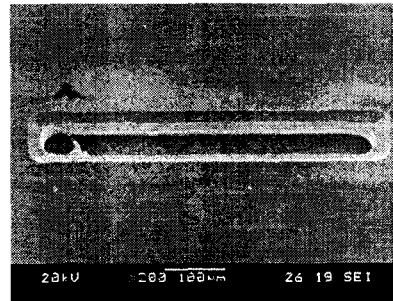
Groove with burr removal by electrical discharge machining at the top surface of the periphery after machining
